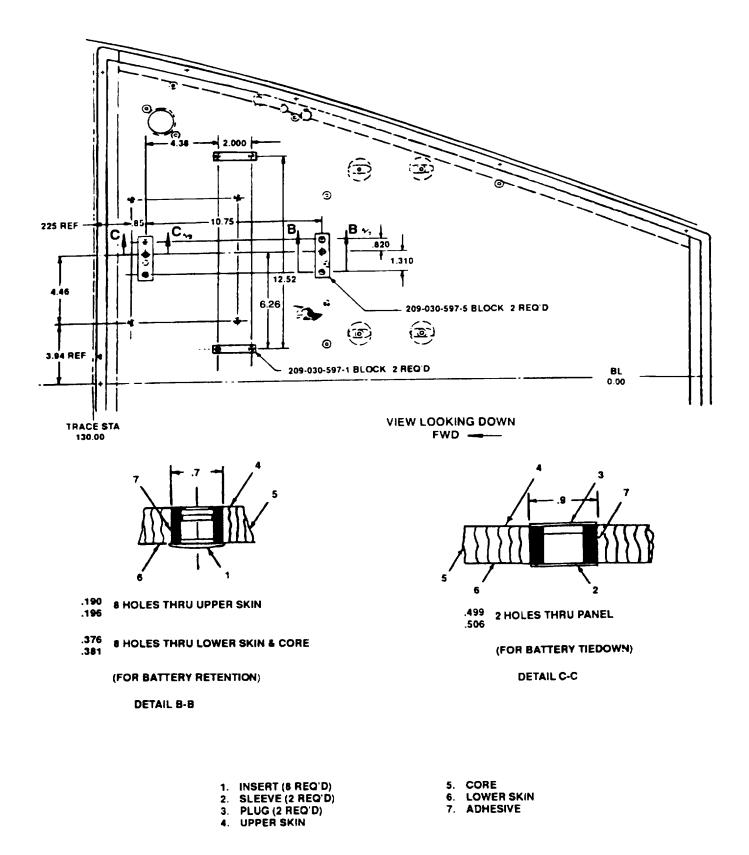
Alternate Battery Installation (Sheet 2 of 2)
